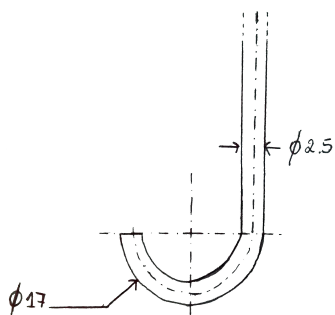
Dimensions of the free tube made with a stainless steel tube of 2.5 mm of external diameter, [mm].
